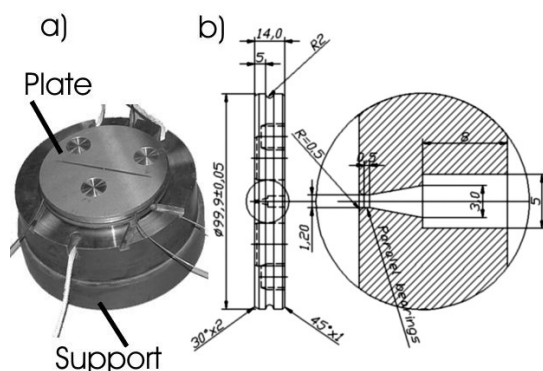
a) Assembled die (plate and support), b) detailed drawing of the plate (top disc) and bearing channel
